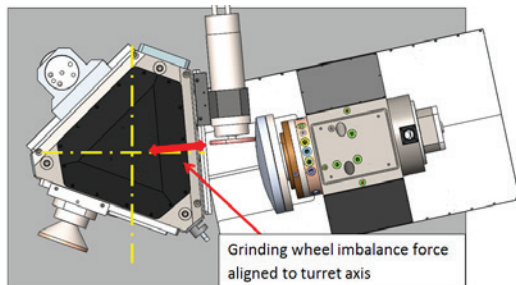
Wheel imbalance forces for peripheral wheel grinding.
